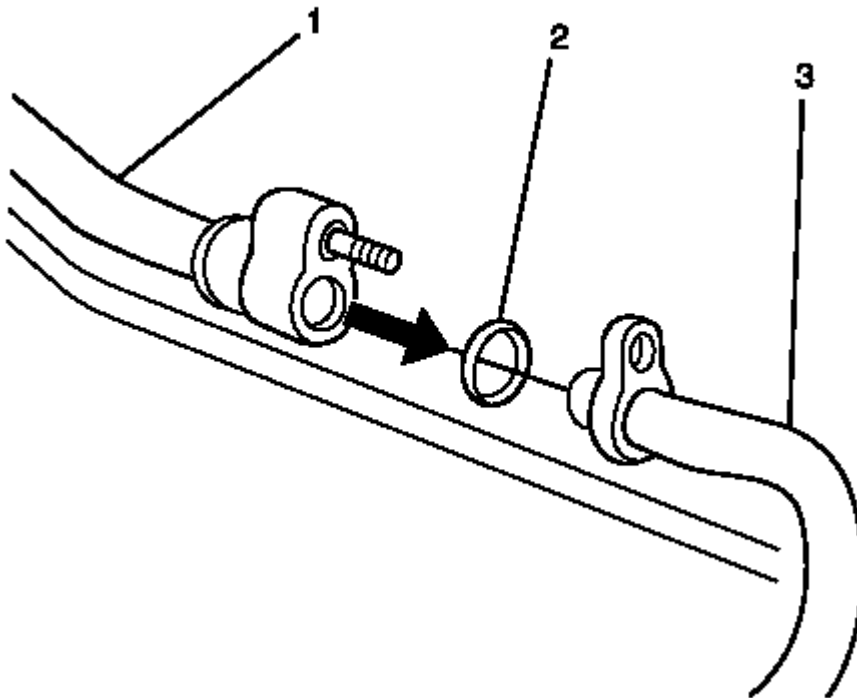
Identifying Upper & Lower A/C Suction Pipe With Sealing O-Ring
